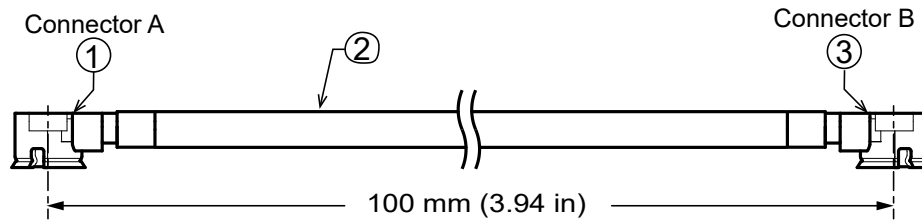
Product Dimensions for the CSG-UFFR-100-UFFR Cable Assembly
